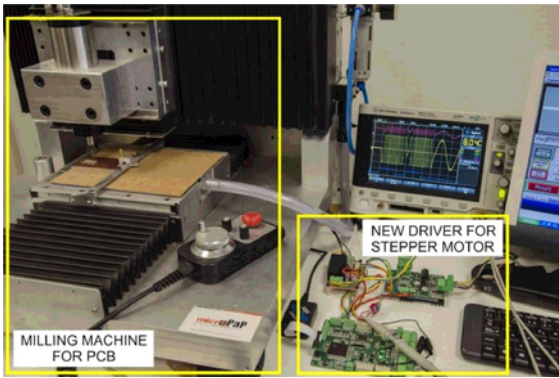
Industry 2 axis rapid prototyping Printed Circuit Boards (PCBs) milling machine.
